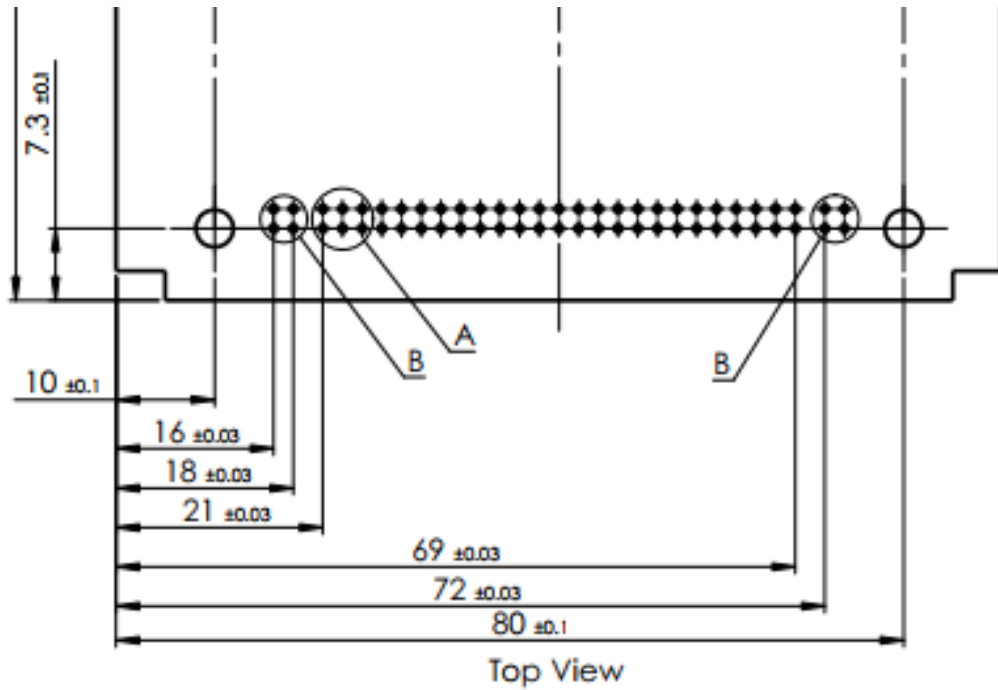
OBC/EPS Board 50pin connector 2D Drawing
